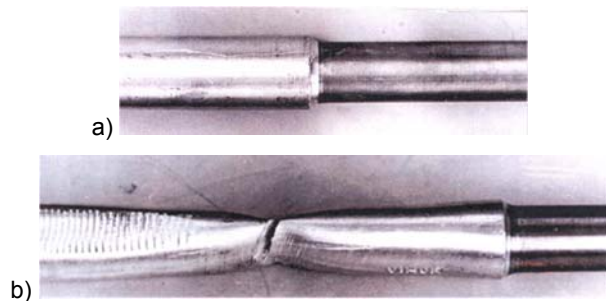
Sample for tensile test (a) and high-quality welded joint after test – fracture in base metal (b)
